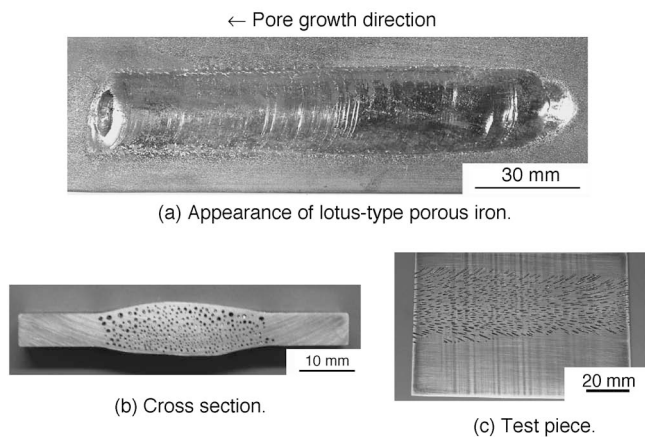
Appearance of the top view of the formed lotus-type porous iron prepared by the continuous zone melting technique (a), its cross section (b), and the test piece for laser welding (c).
